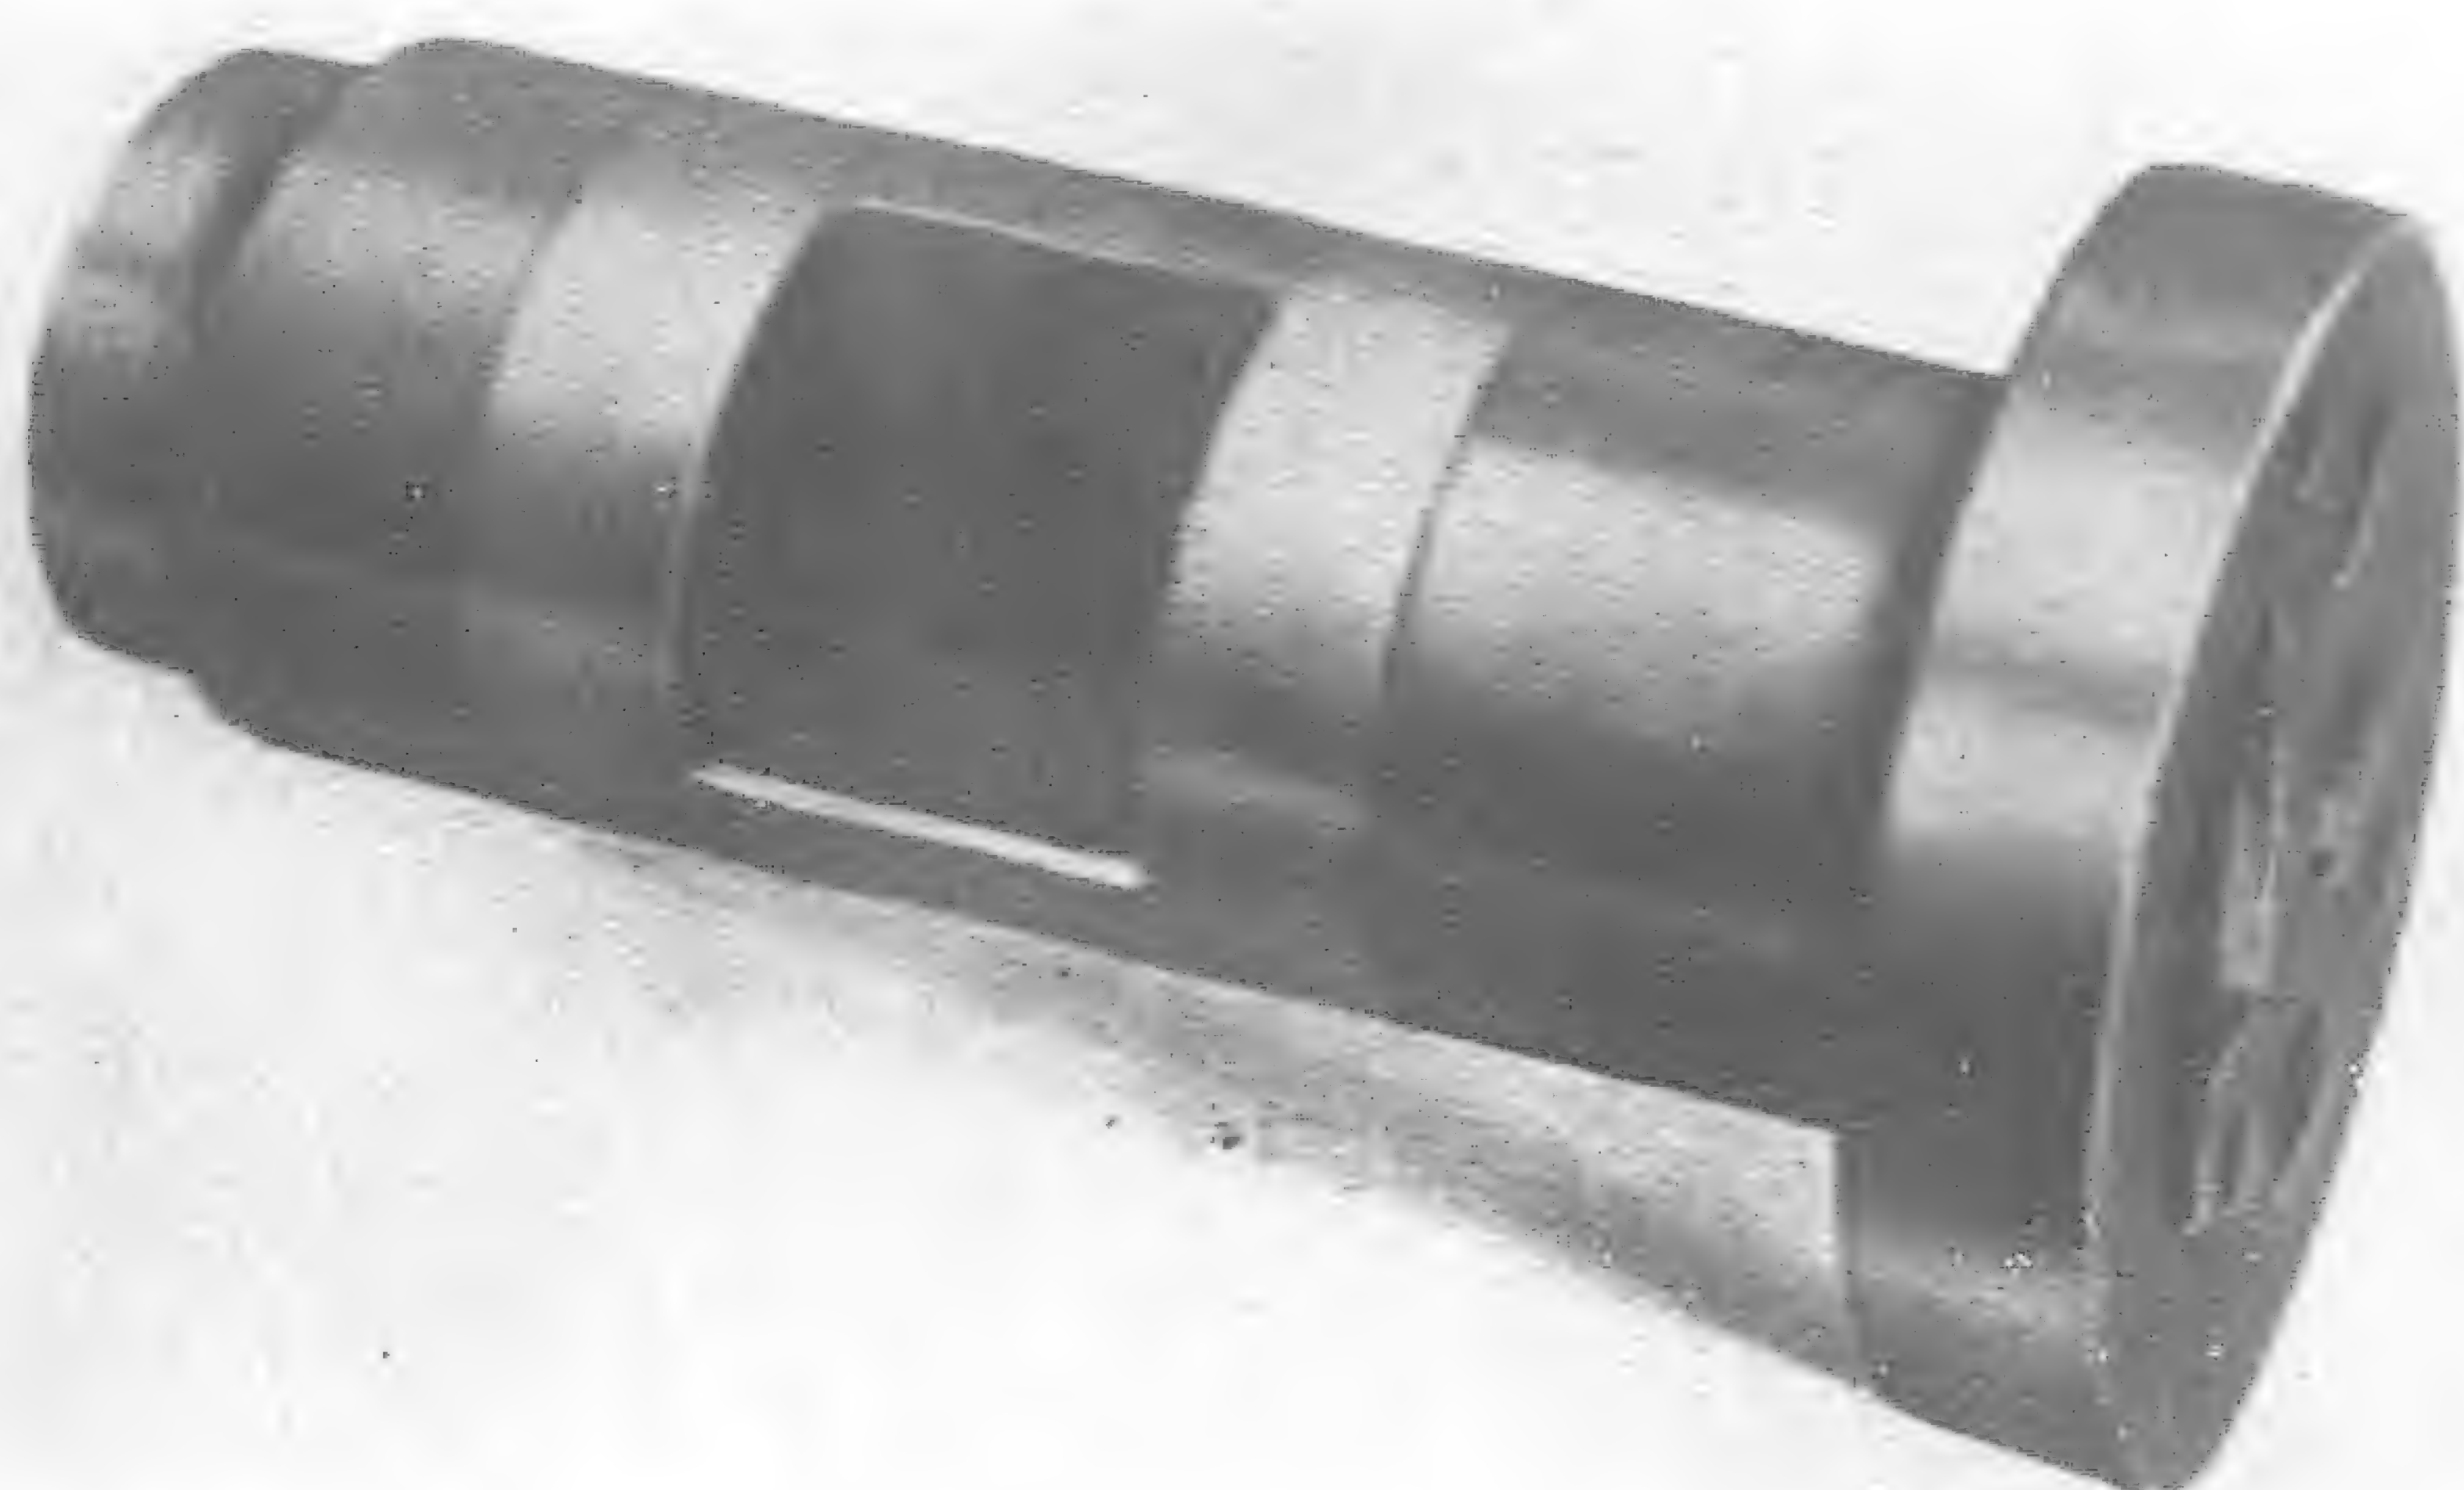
Central Valve of the H.S.B. Air Compressor
